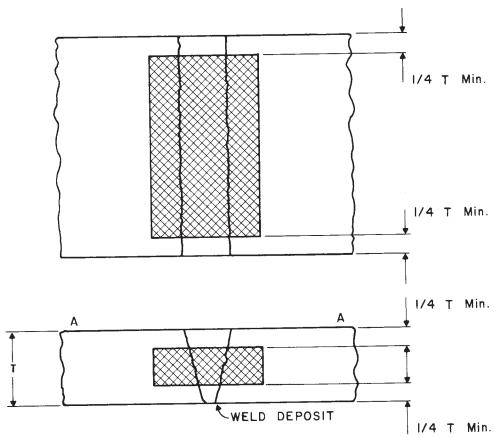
Charpy V-Notch Specimen Must Be Within Cross-Hatched Zone With Notch in the Weld Metal Perpendicular to Surface A-A
